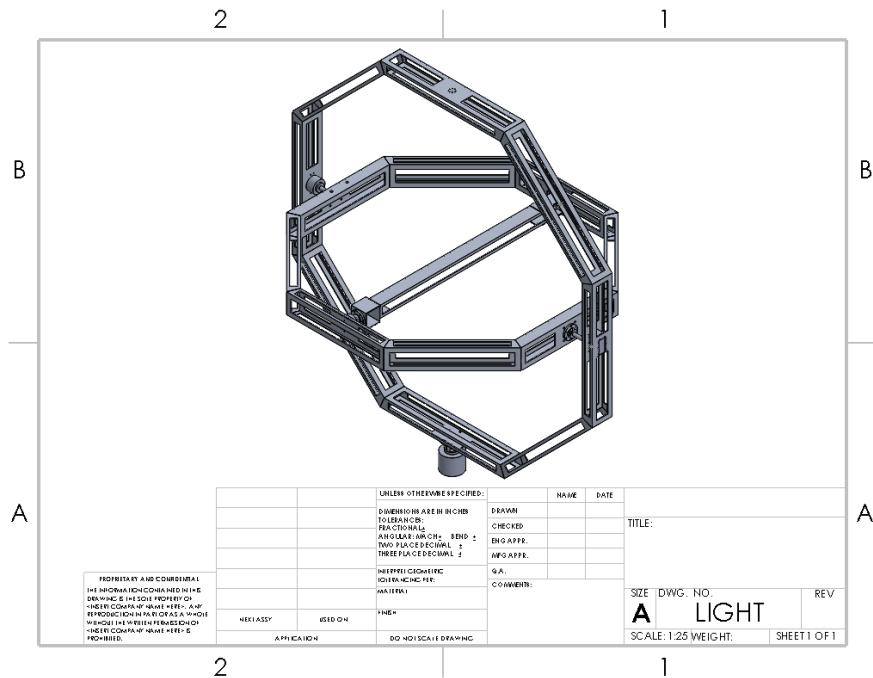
Lightened CAD model of the thrust stand assembly after mass-reducing modifications.
